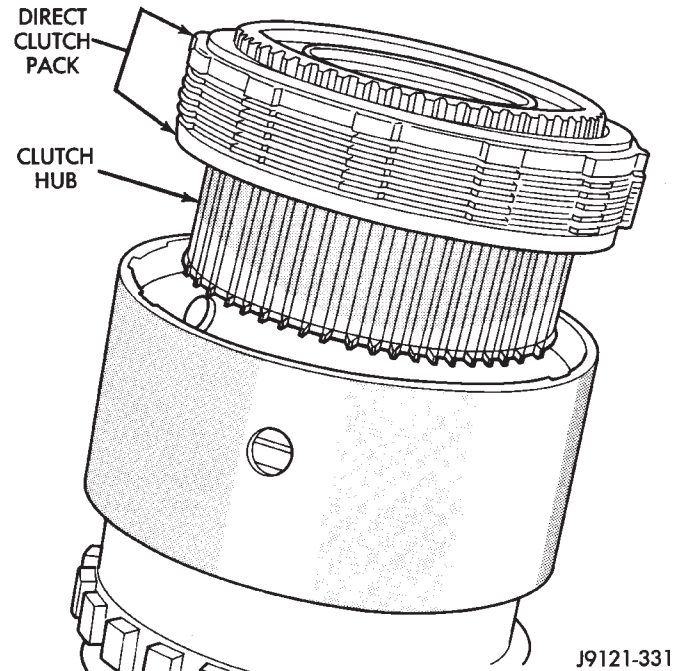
Installing Assembled Direct Clutch Pack And Hub
